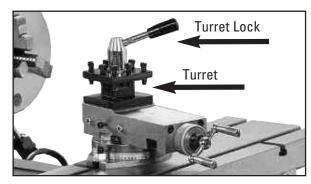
Compound Angle Toolpost Installed on Cross-Slide Table
